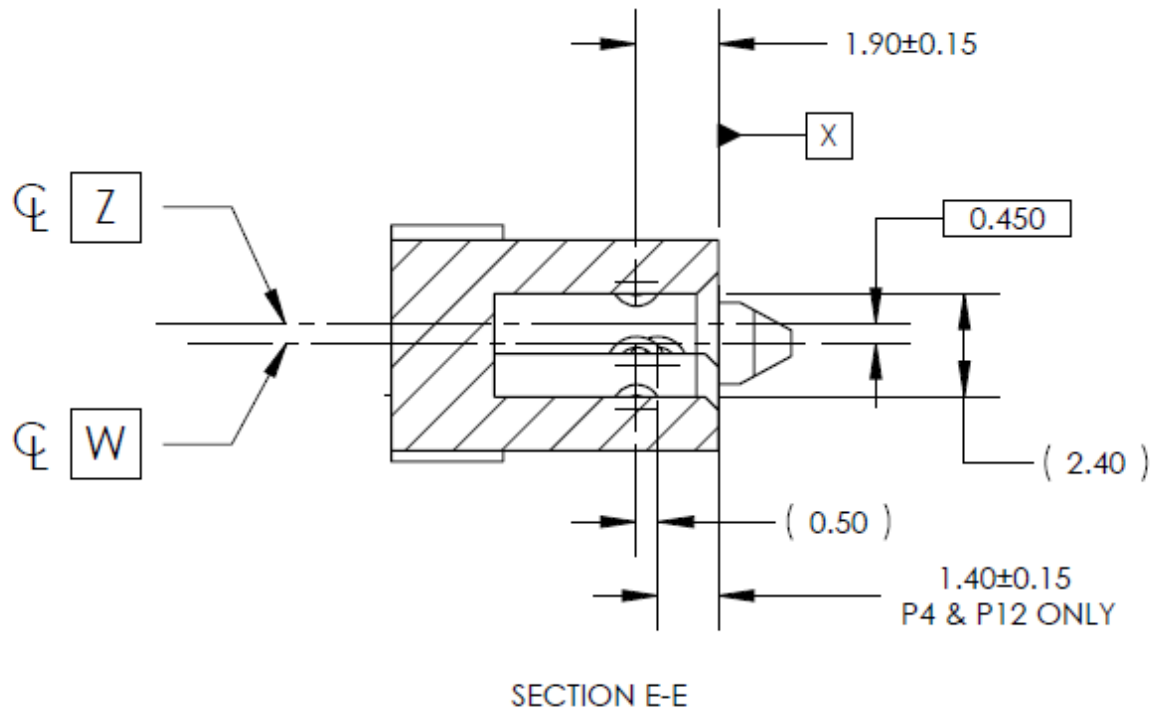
Connector Plug Mechanical Drawing – Drive Keep-out Area
